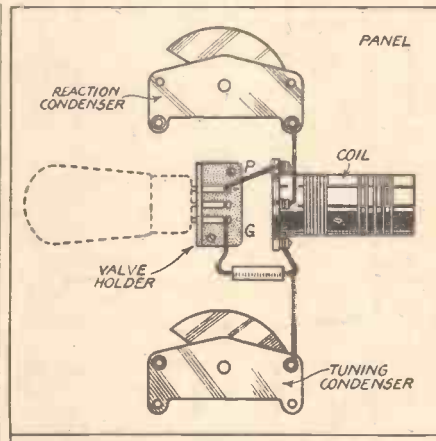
In this arrangement the coil and valve-holder are mounted on brackets attached to the panel.
